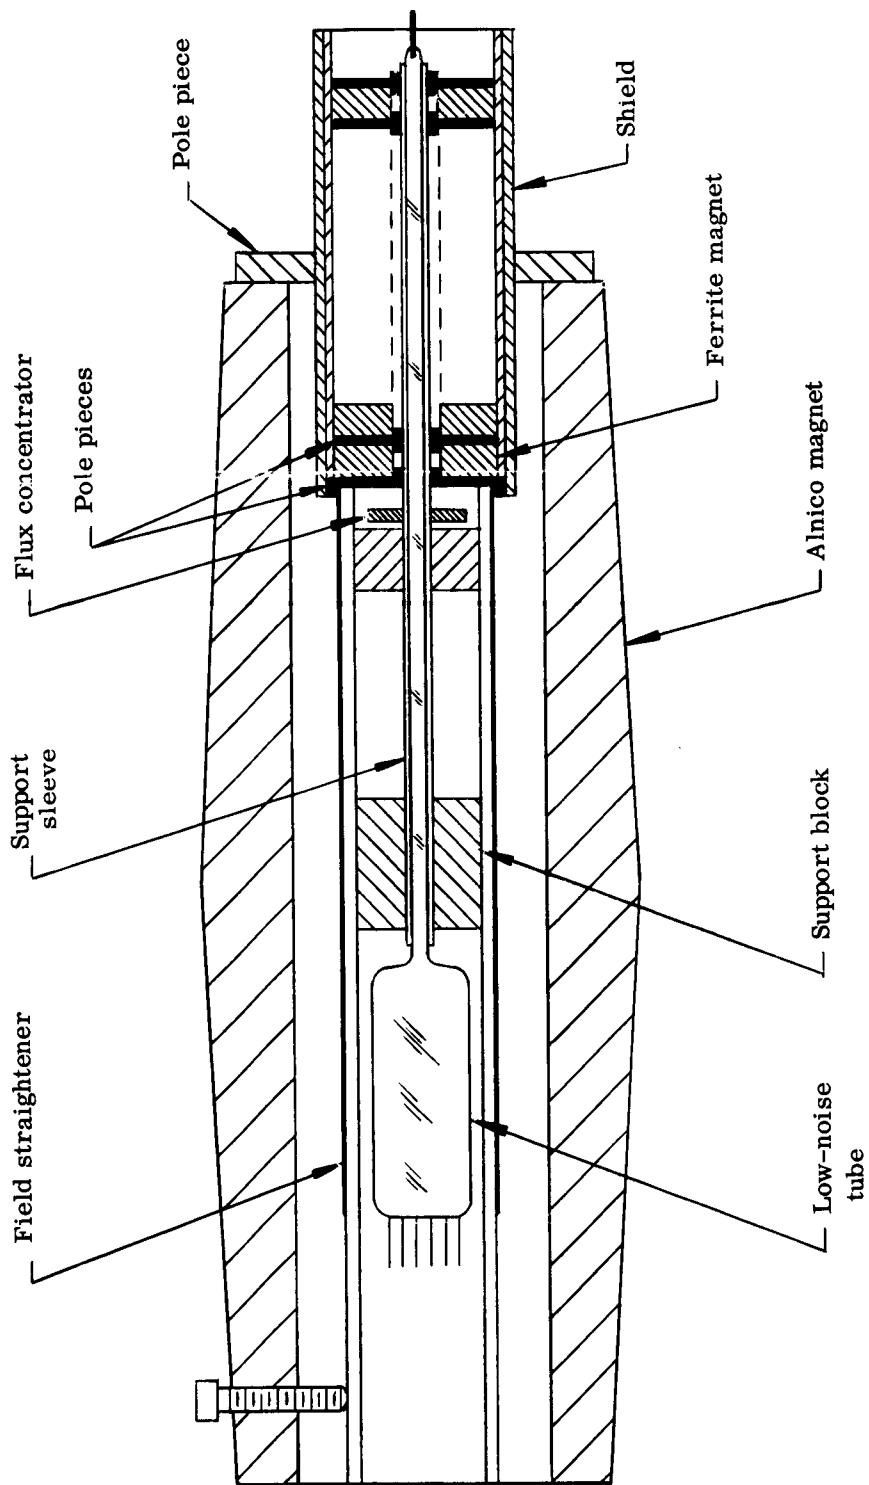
Cross-sectional sketch of experimental PM-PPM focusing assembly.
